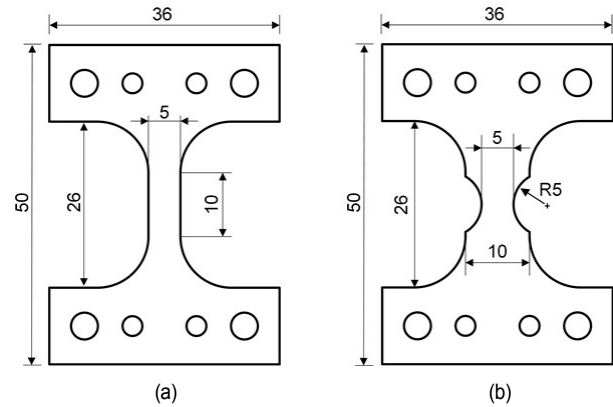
The dimensions of test specimens: (a) uniaxial tensile; (b) notched tensile ($R = 5$ mm).
